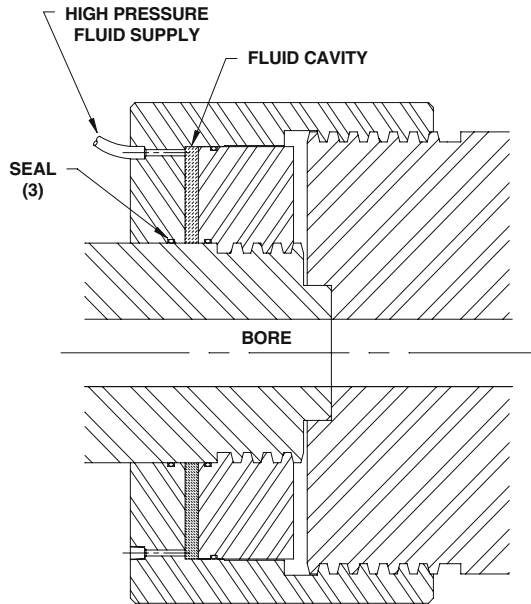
Hydraulic clamp used to join light-gas gun components
